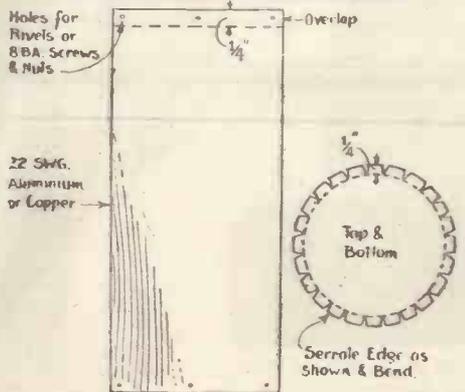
Layout of metal for circular can—the top and bottom being separate pieces
